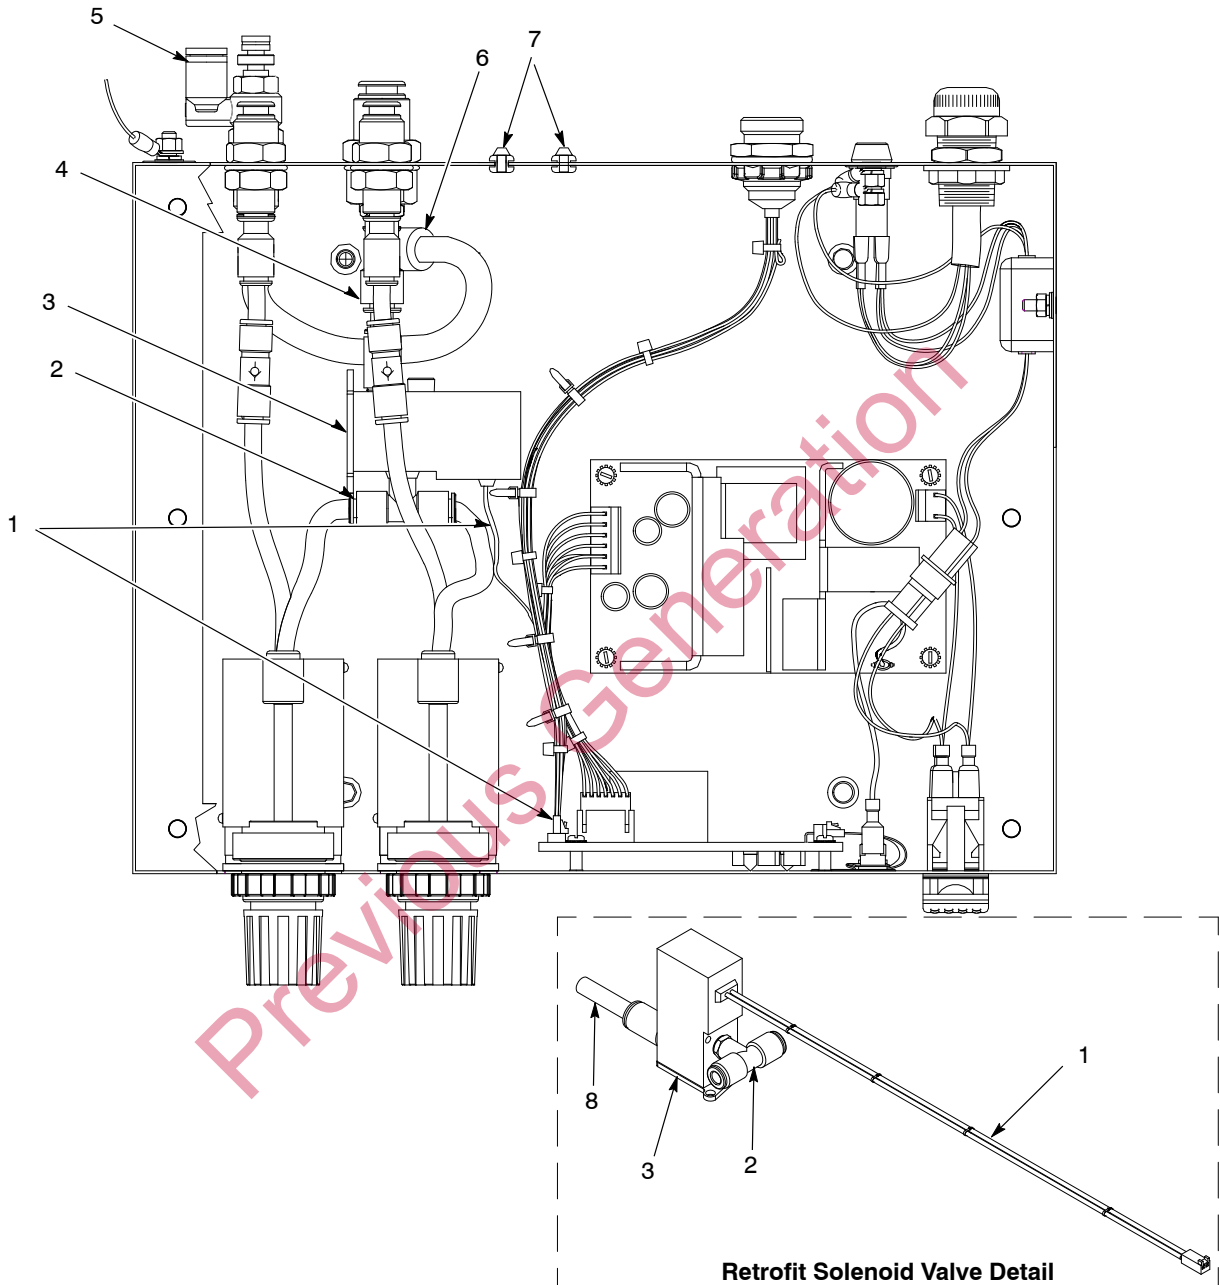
Solenoid Valve Retrofit — Removing the Old Solenoid Valve
